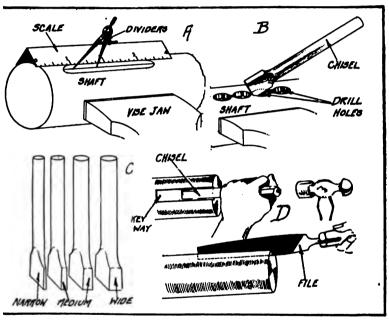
Methods of Cutting Keyways in Shafts without Machine Tools.
